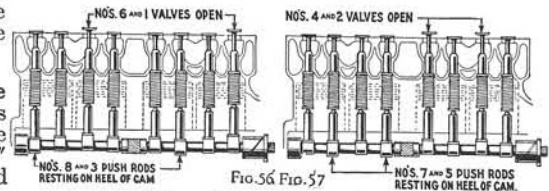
(left). After adjusting the clearance between numbers 4 and 2 valves and push rods, again turn the engine over exactly one-half turn. Numbers 6 and 1 valves will now be open, and numbers 8 and 3 push rods will be resting on the heel of their respective cams.
